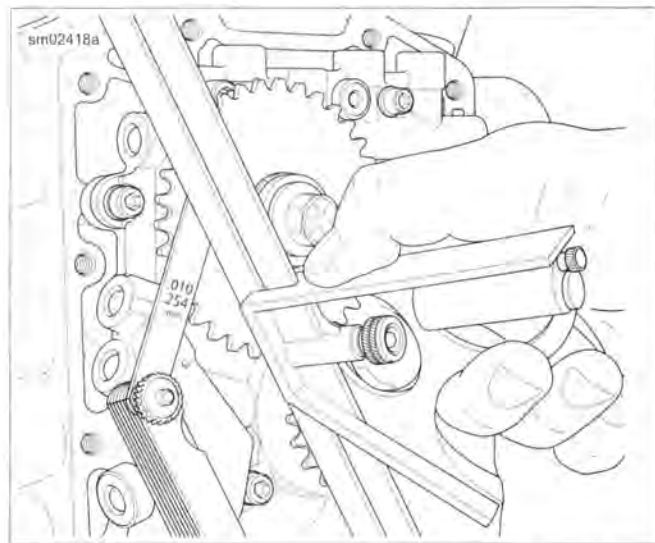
Check Alignment of Crank and Rear Cam Sprocket Faces
